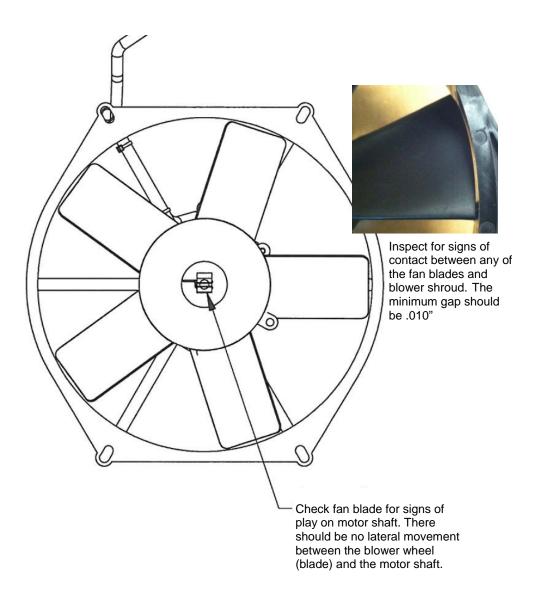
S-6063EC-1 Condenser Blower Assembly
